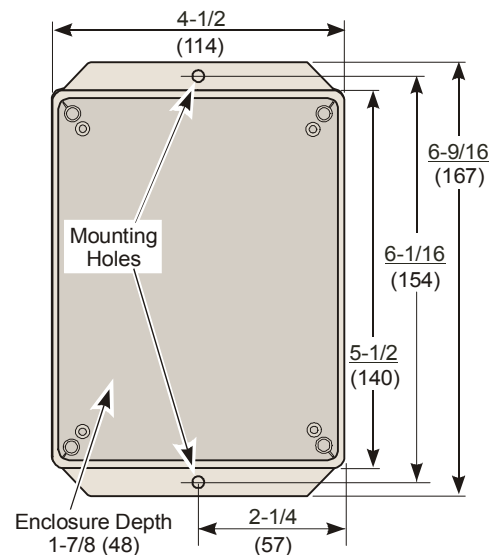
WTSS Communications Board Dimensions, in. (mm)
